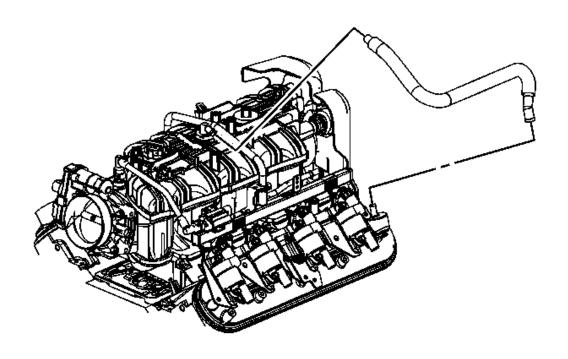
View Of PCV Hose Courtesy of GENERAL MOTORS CORP.
